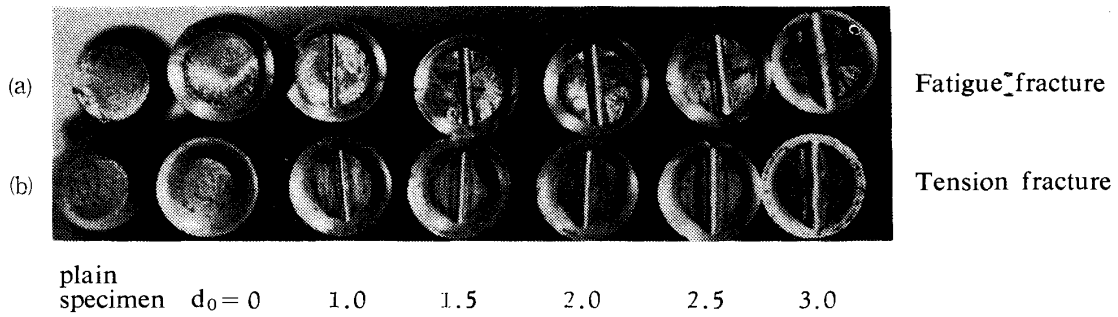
Fatigue fracture compared with tension fracture.
